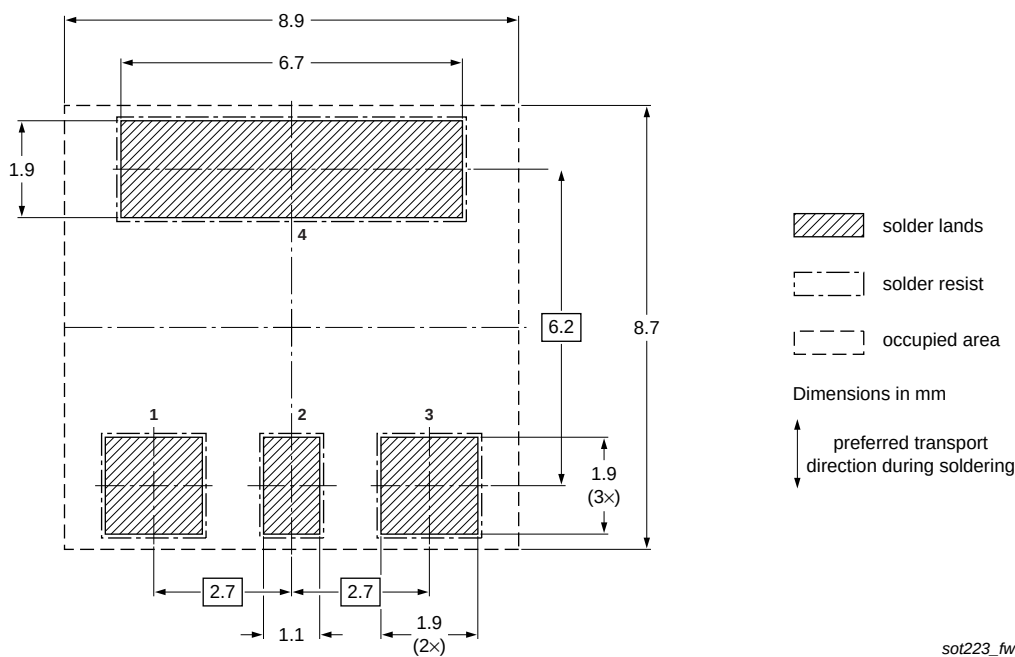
Wave soldering footprint for SOT223 (SC-73)
